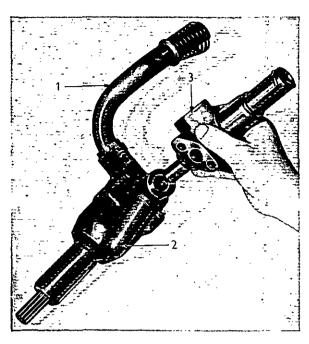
Oil Pump and Oil Delivery Housing Assembly.
